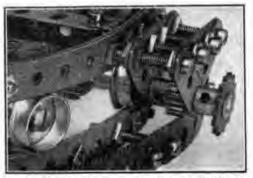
This illustration shows how the geared roller bearing is rotated through a Pinion engaging a ring of Rack Strips.
